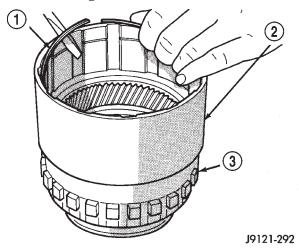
Clutch Drum Inner Retaining Ring Removal
